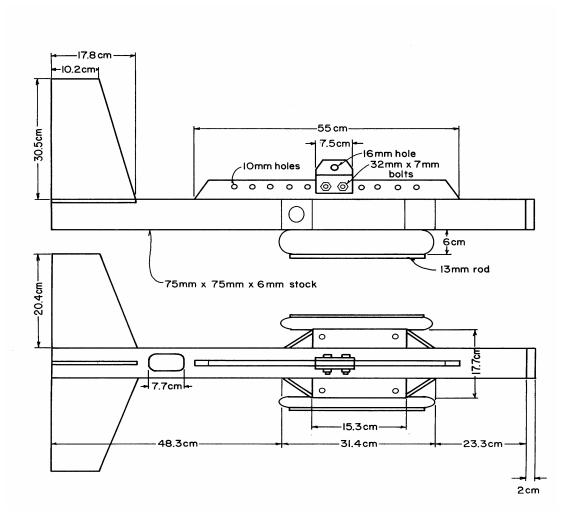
Schematic of the single transducer towed body showing dimensions. The top diagram is a side view with the adjustable cable attachment bracket and adjustable connecting eye for attaching a cable thimble. The bottom diagram is a top view of the towed body.
